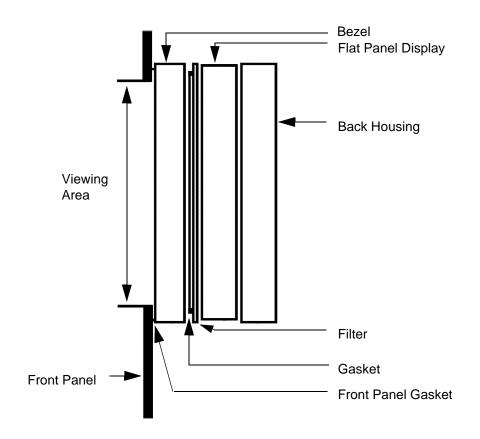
Typical NEMA 4 Mounting Method (Side View)
